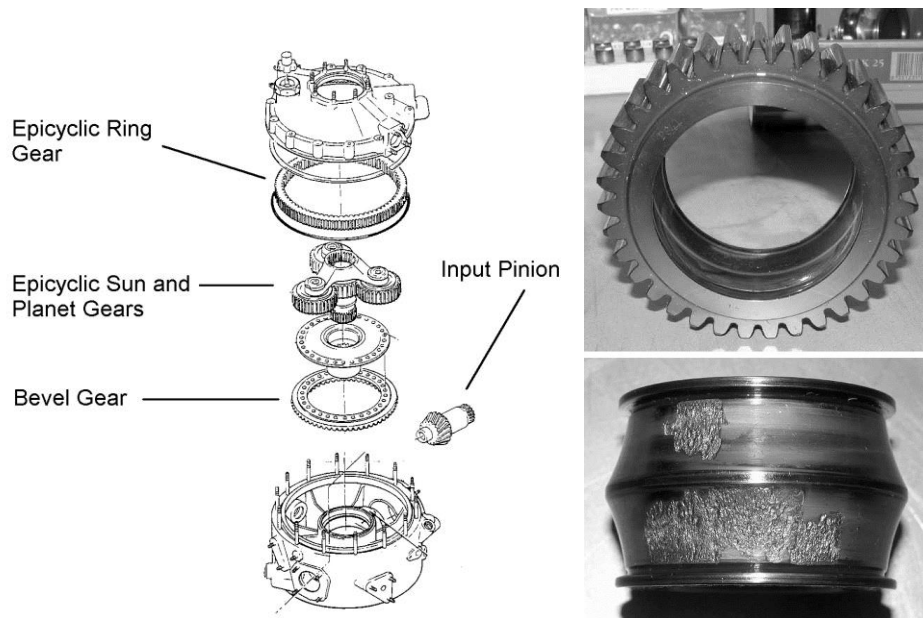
Bell 206 main gearbox (left), planet gear and planet bearing (right)
